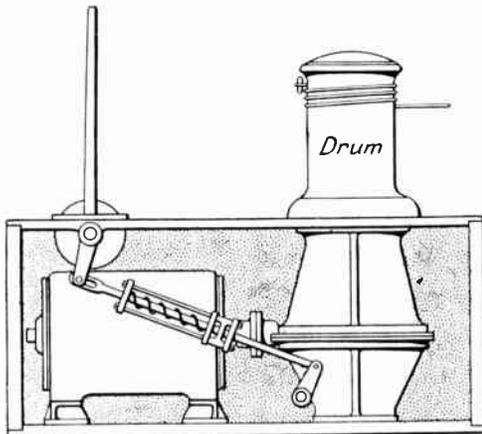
LEVER CONTROL OF A CAPSTAN MOTOR-STARTING SWITCH AND CAPSTAN HEAD CLUTCH.
